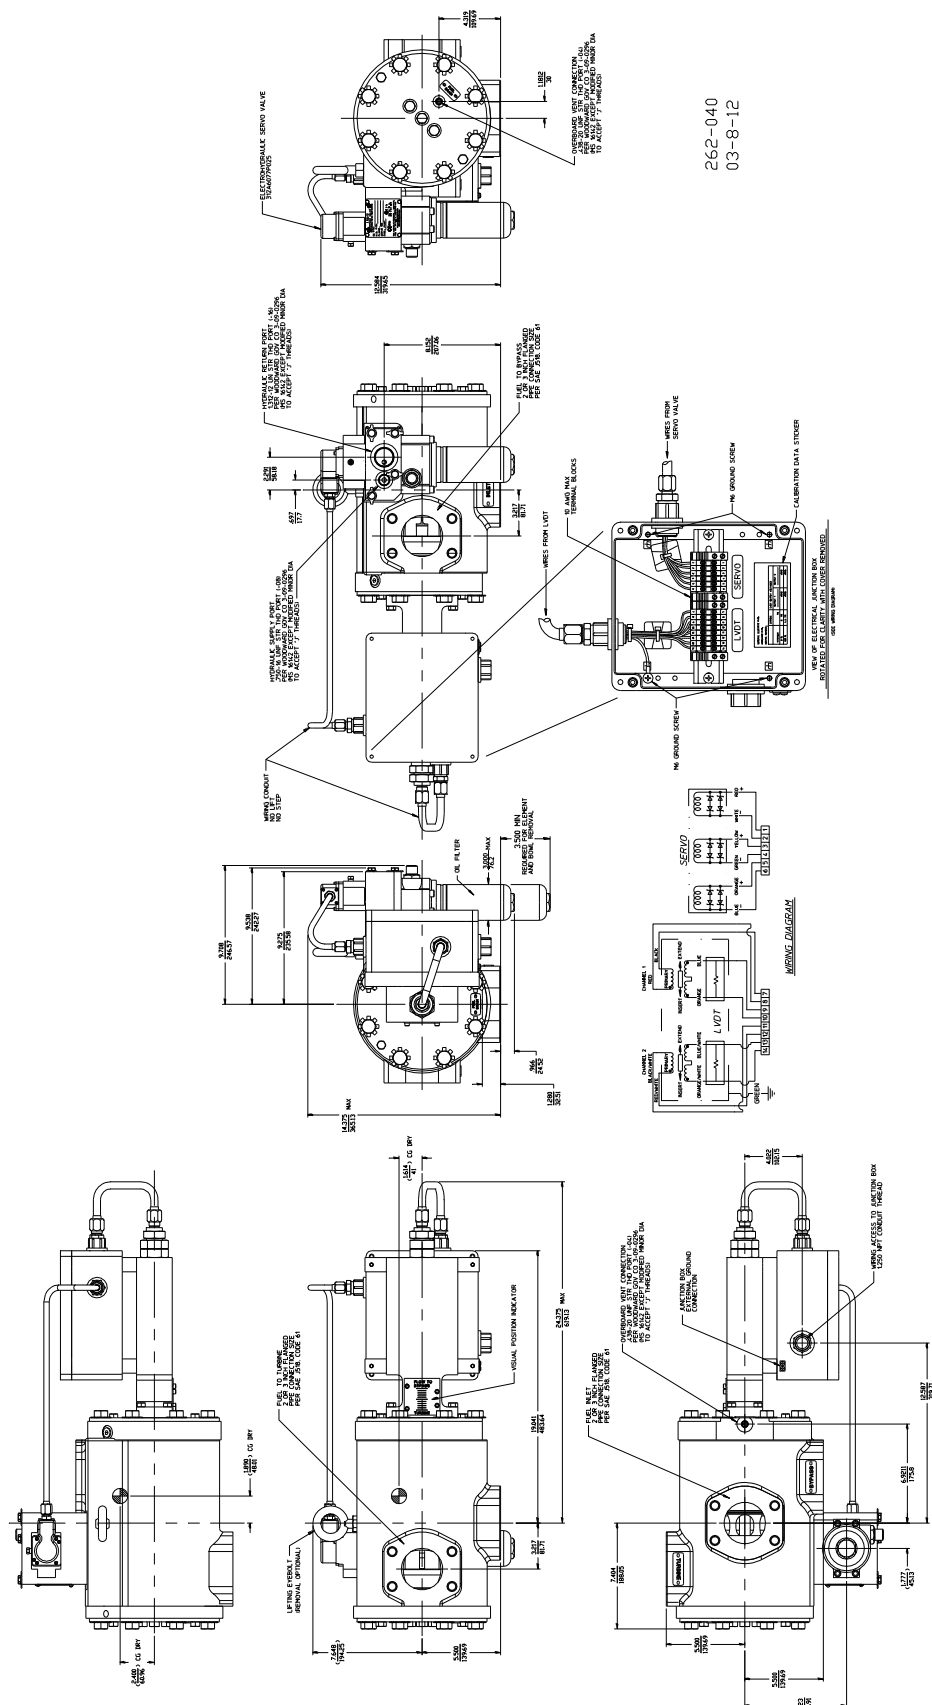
Outline Drawing—Bypass Valve with Integrated LVDT
